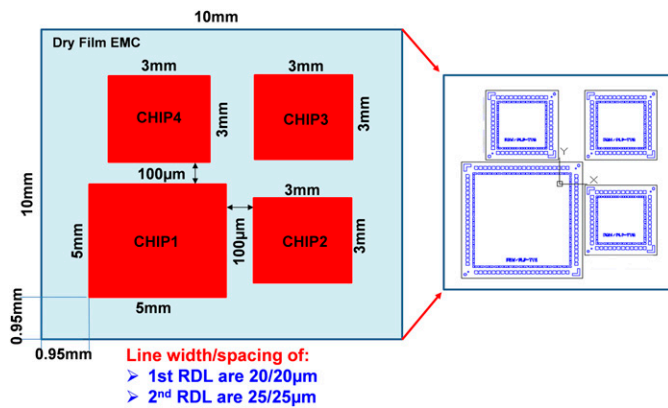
Test package. One 5 × 5-mm chip and three 3 × 3-mm chips. Package dimensions = 10 × 10 mm.
